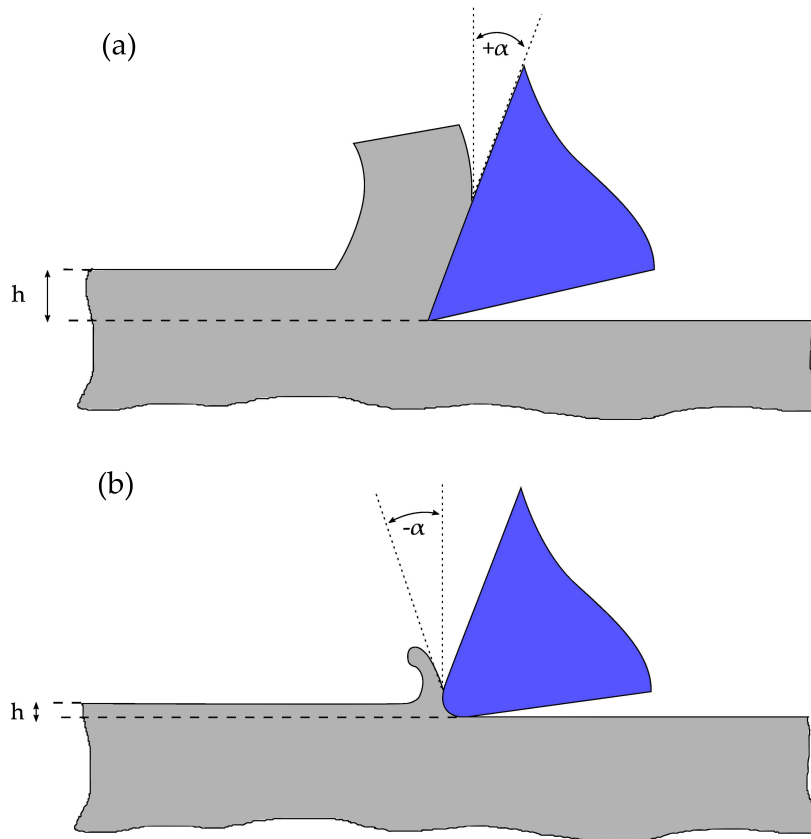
(a) shows a macro-tool (zoomed out) and (b) shows a micro-tool (zoomed in). Although both tools have the same cutting edge radius at the start of machining, the cutting edge radius for the micro tool is typically much closer to the depth of cut than for the macro tool.
